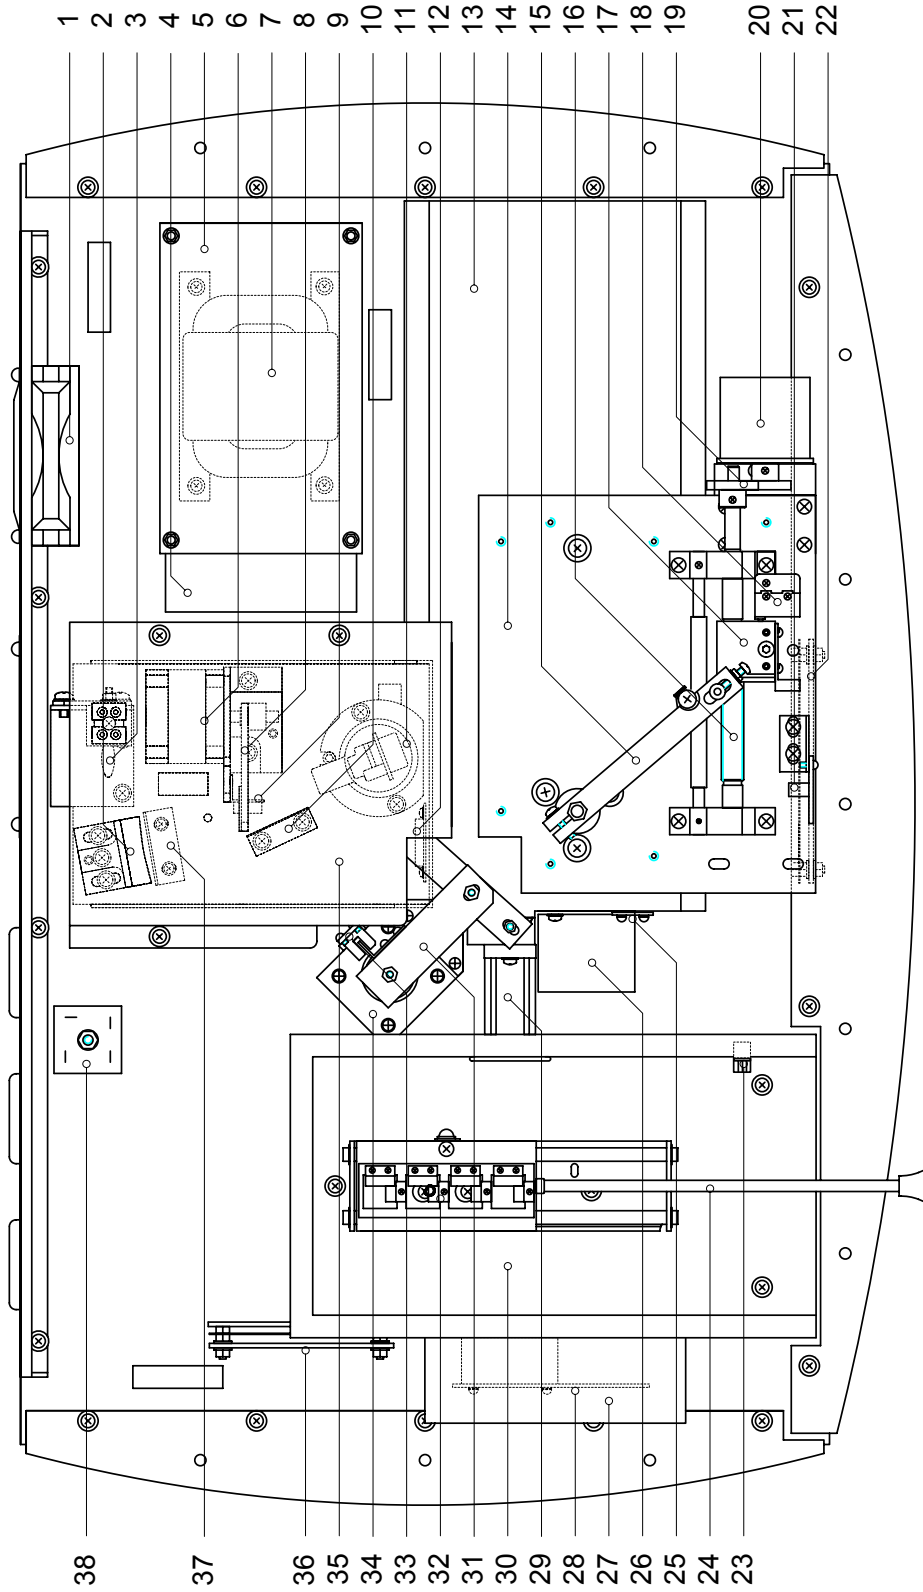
Layout of UV-2802S, UV-2802PCS Inside Top View
